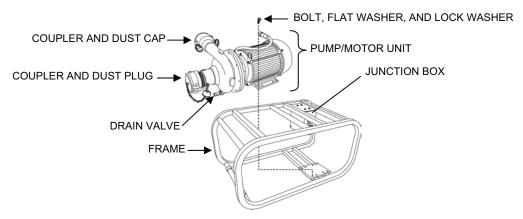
MF Feed Pump P-3 Pump/Motor Assembly Replacement.
